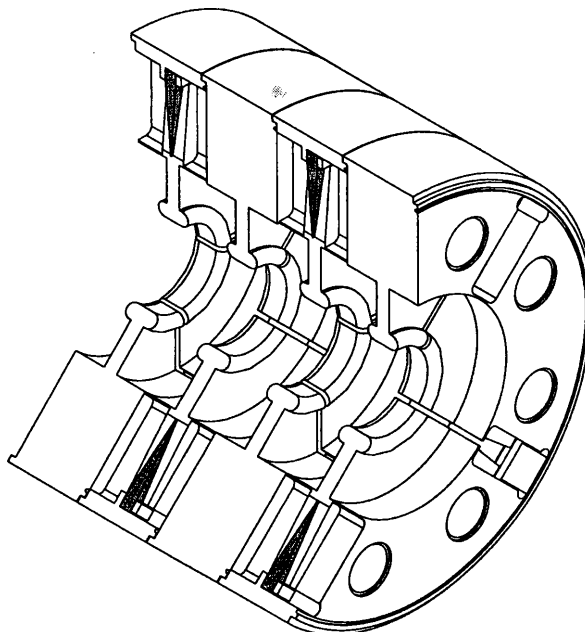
Cutaway view of 4 SICA cells. The outer diameter is 174 mm. The round holes are cooling water tubes; dimple tuning is provided (not shown).
